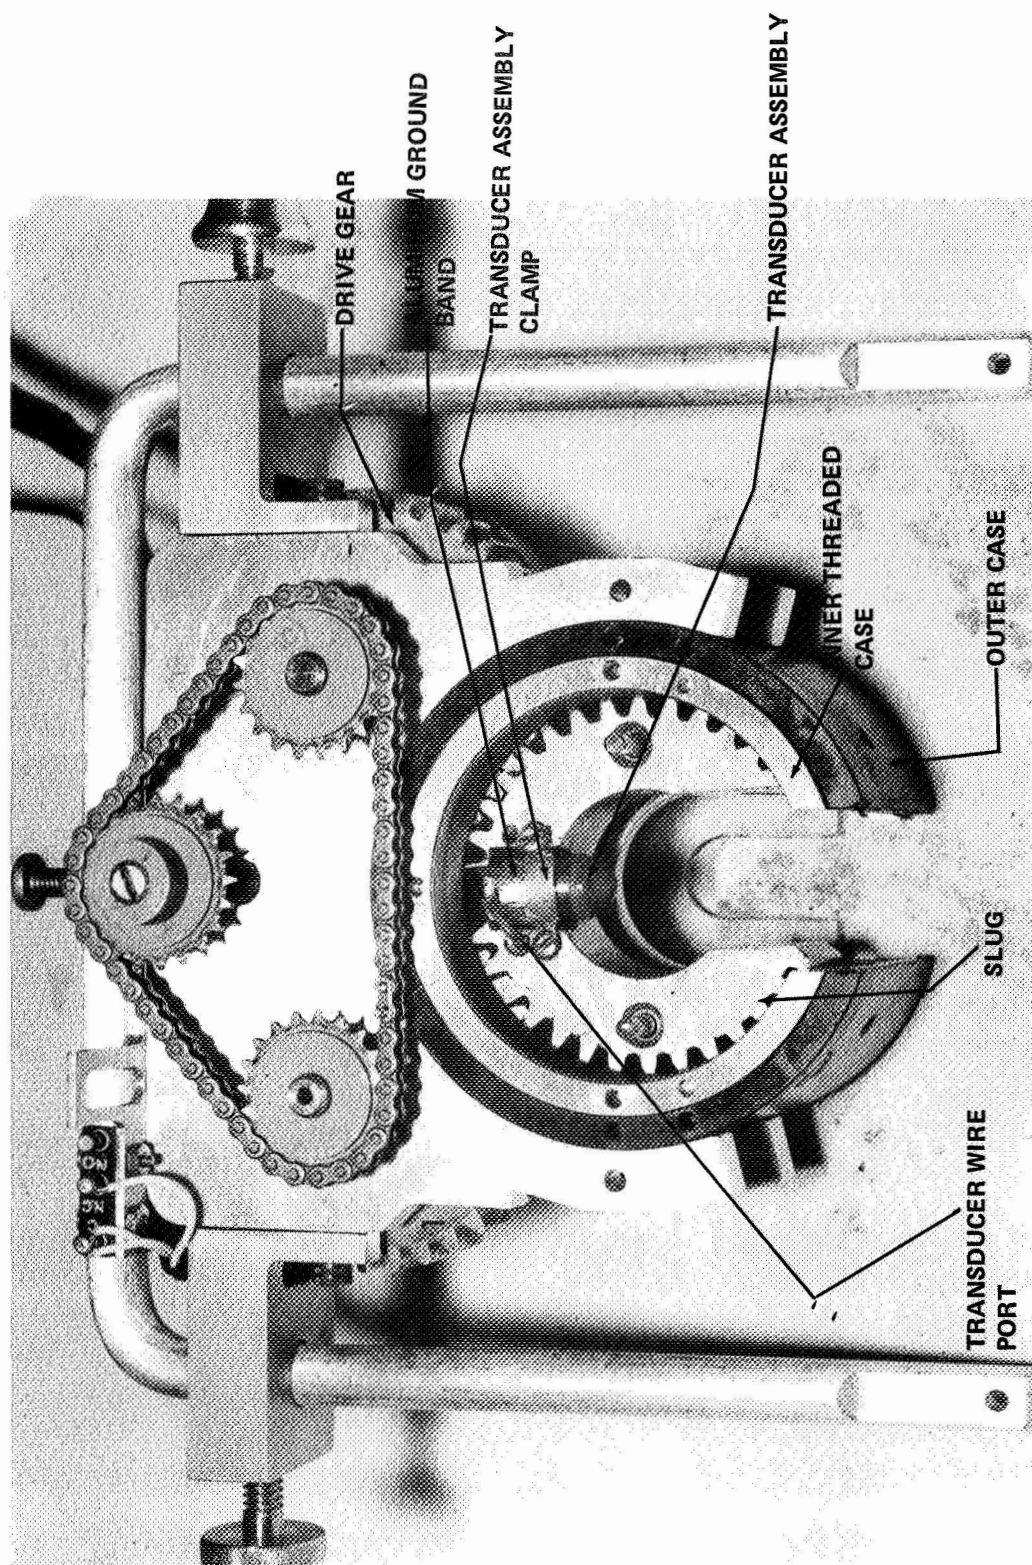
Prototype scanner head, front view excluding alignment plate and limit switch contact arm.
